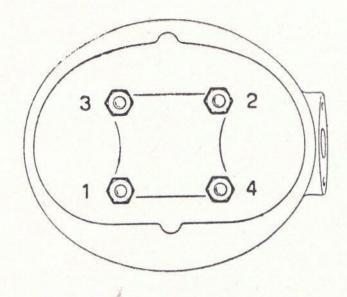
Arrangement of tightening cylinder head nuts adjustment of valve clearance.
